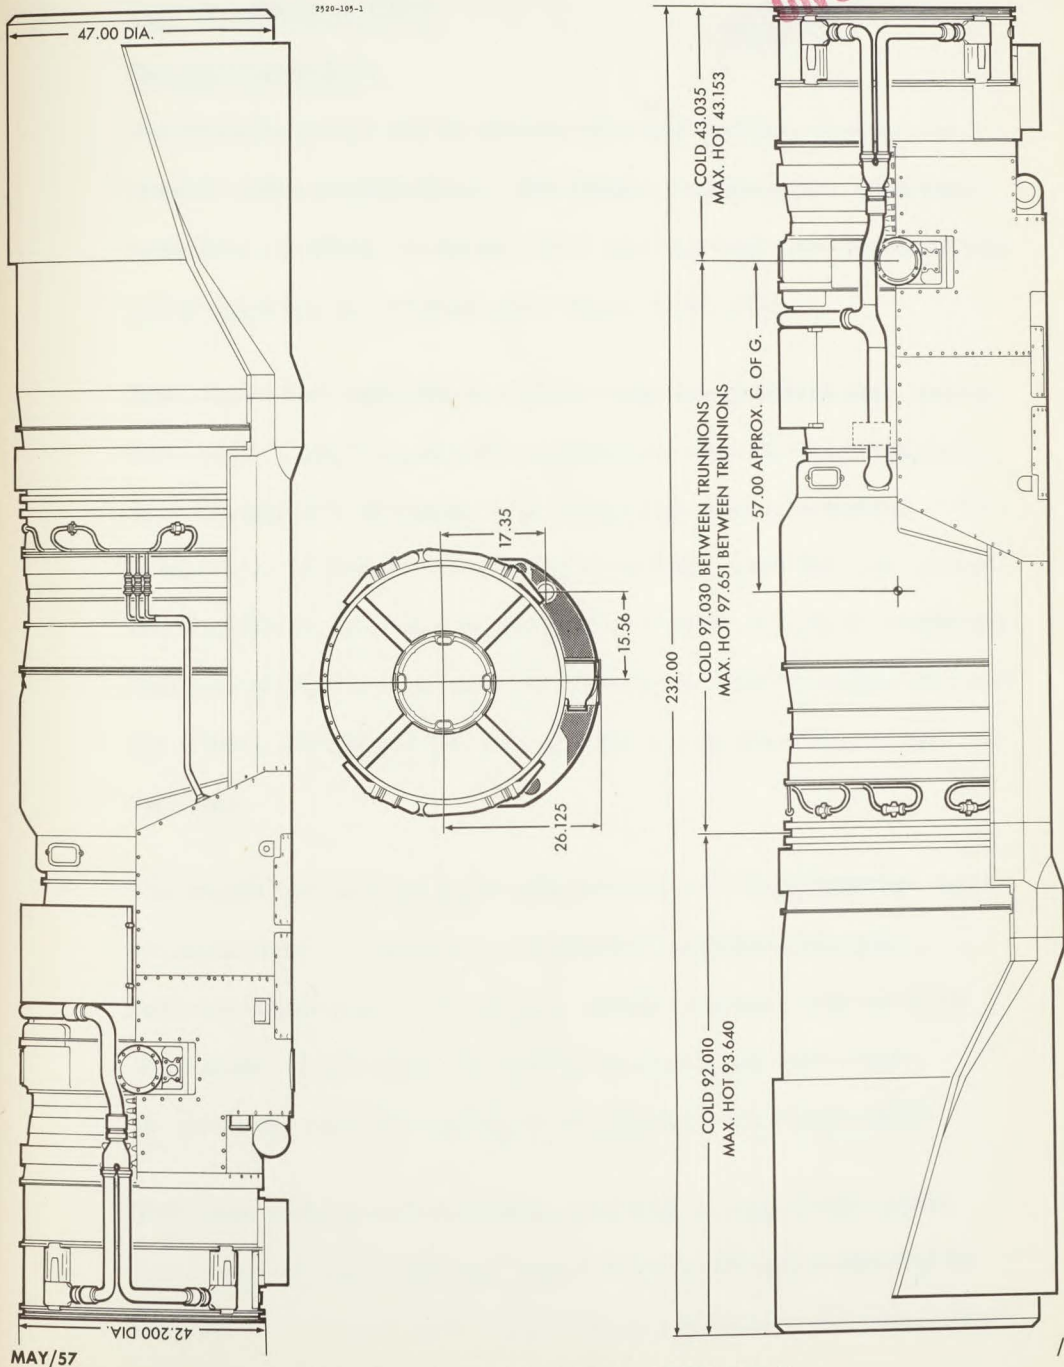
MAJOR DIMENSIONS - SERIES 2 IROQUOIS ENGINE
